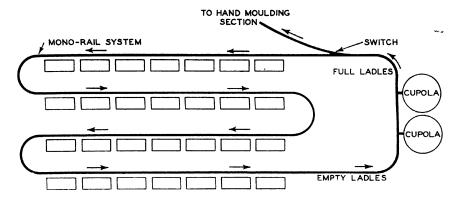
EMPLOYMENT OF AN OVERHEAD MONORAIL FOR TRANSPORTING LADLES OF METAL ALONG THE LINES OF MOULDS
